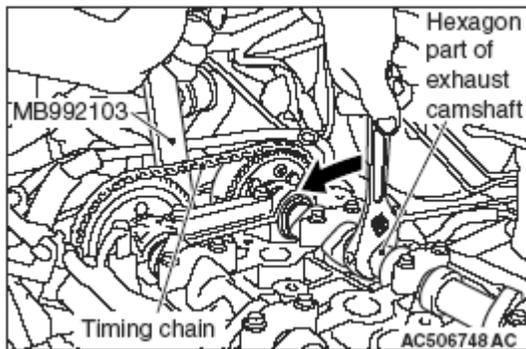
Turning Camshaft Clockwise To Timing Chain Between Camshaft Sprockets
